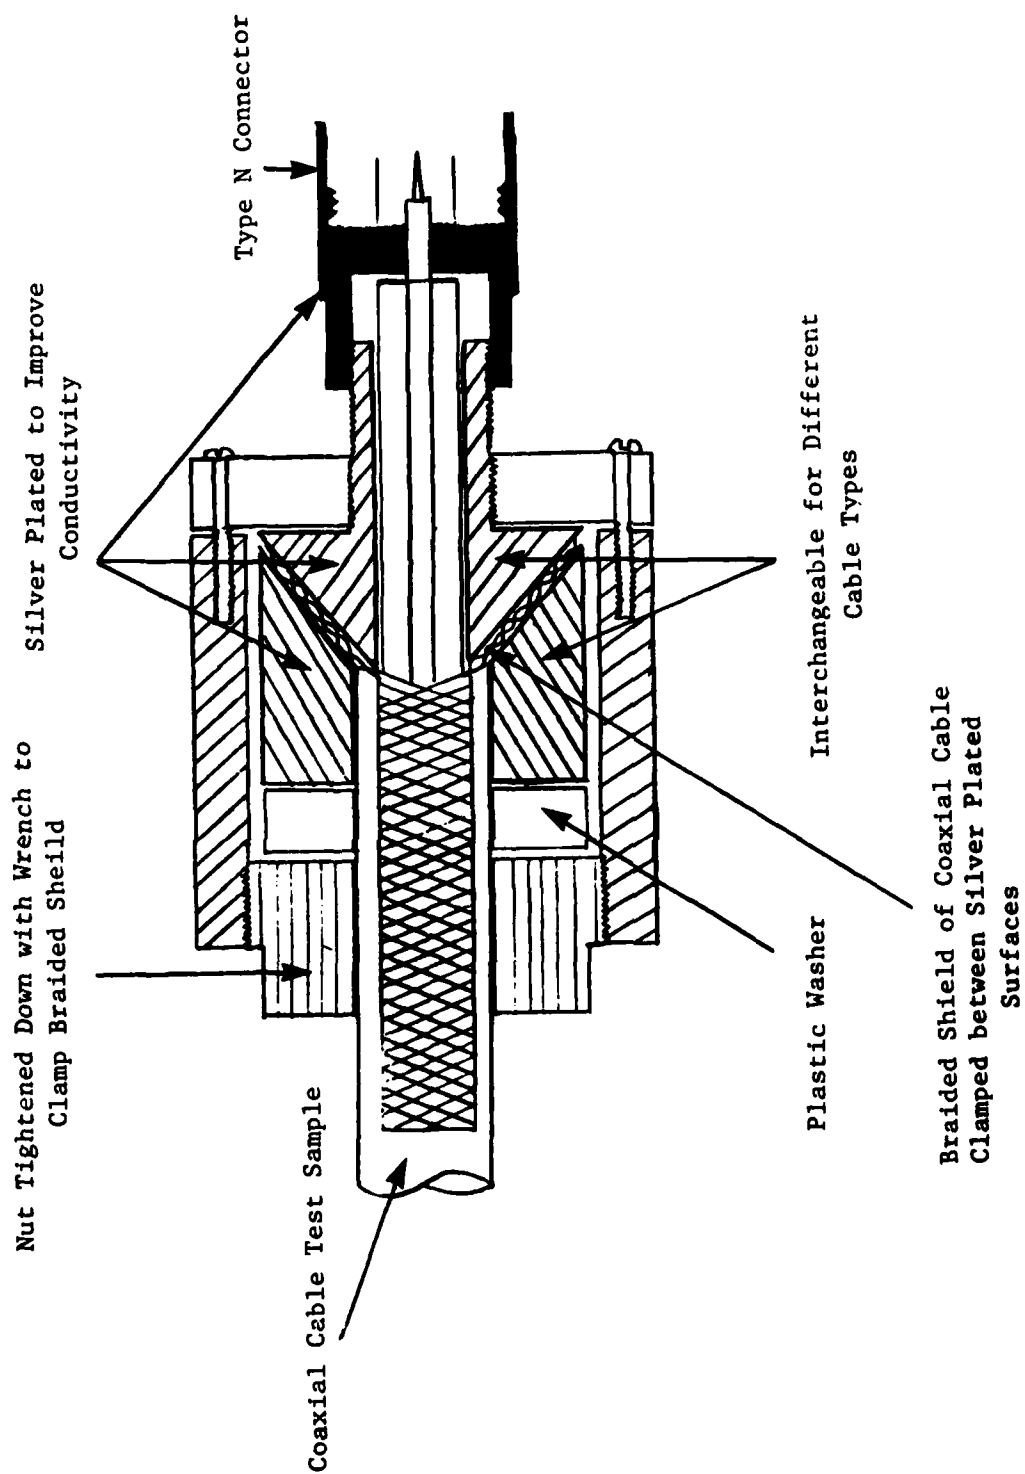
Cross-Sectional View of Coaxial Cable Test Jig
